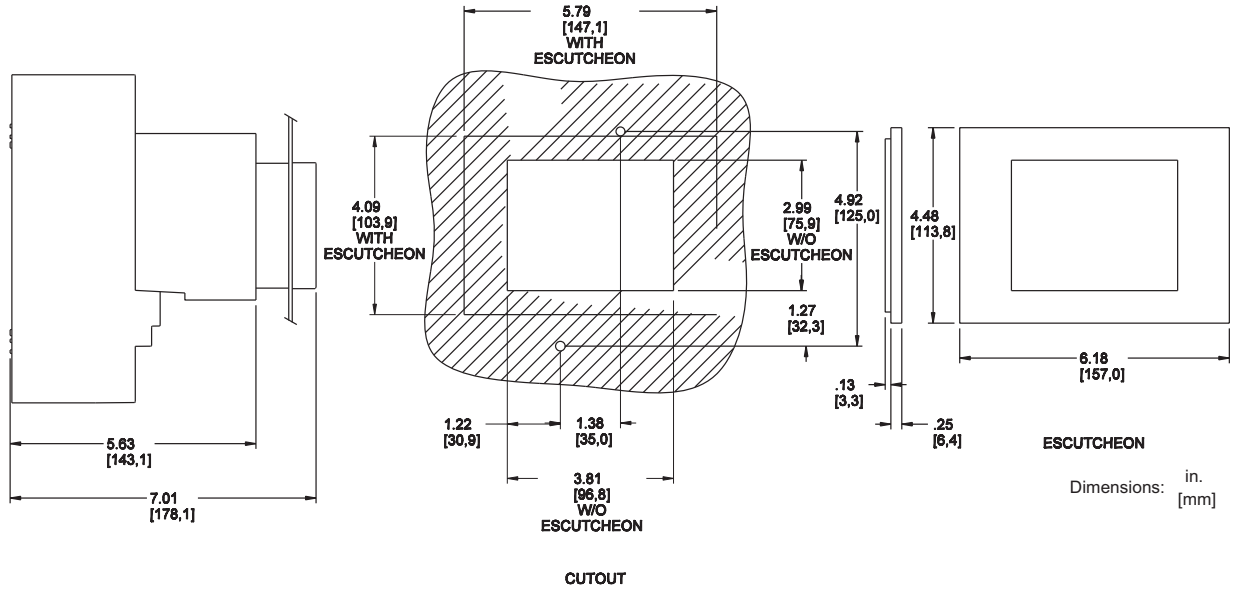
PowerPact H- and J-Frame Circuit Breaker Door Mounted Rotary Handle Cutout
